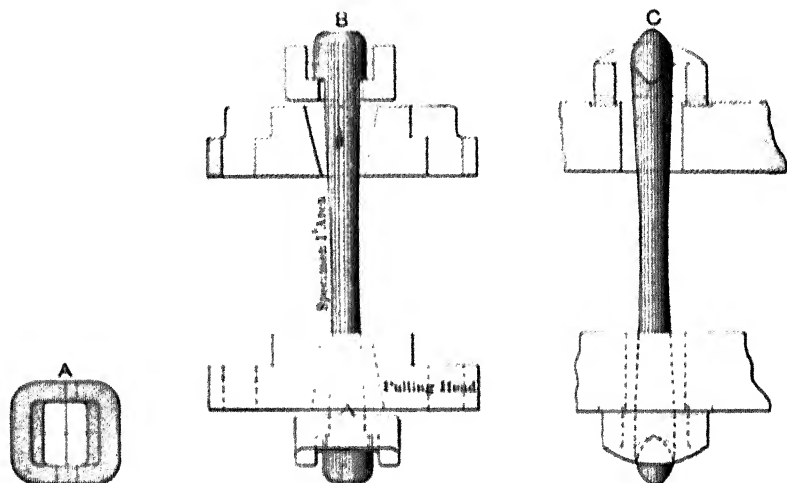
CAST-IRON SPECIMEN AND SELF-CENTERING GRIPS.
